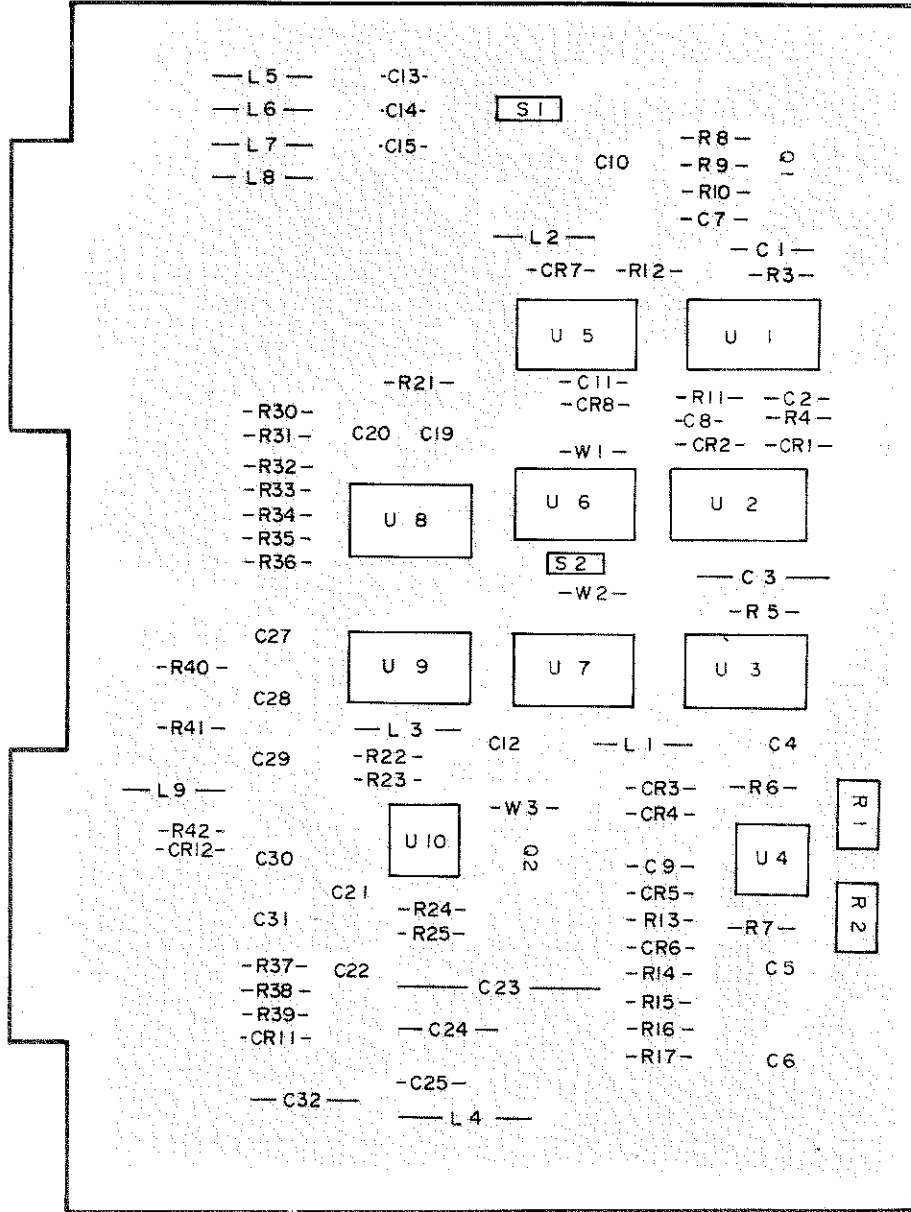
A12 PLL Sampling Controller Board Assembly Component Locations.
